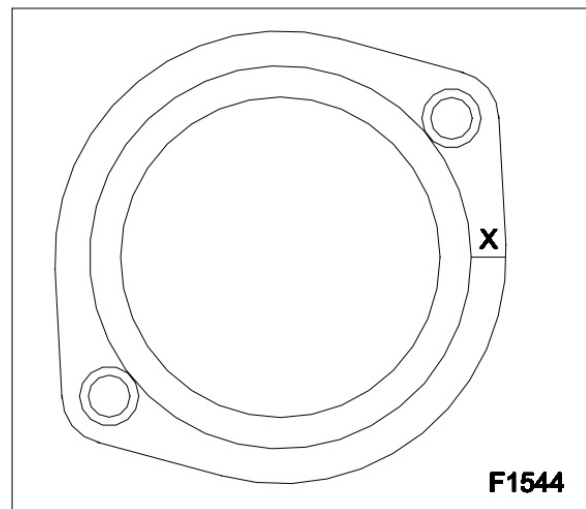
Exhaust Inlet Adapter/Exhaust Tube Gasket Mating Surface Dimension, Late 1997 Model Year and Up
